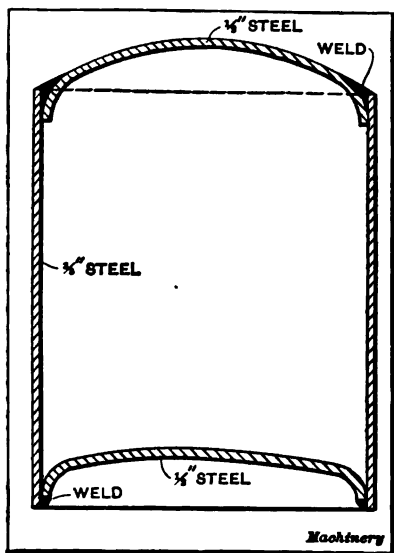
Example of Tank welded by the Oxy-acetylene Process
